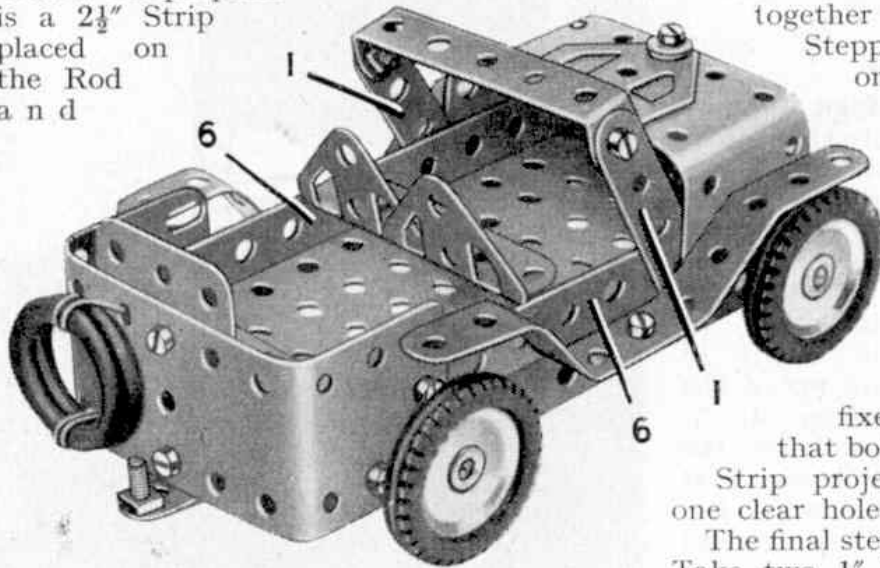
This rear view of the Jeep shows the arrangement of the spare tyres and the towing hook.
